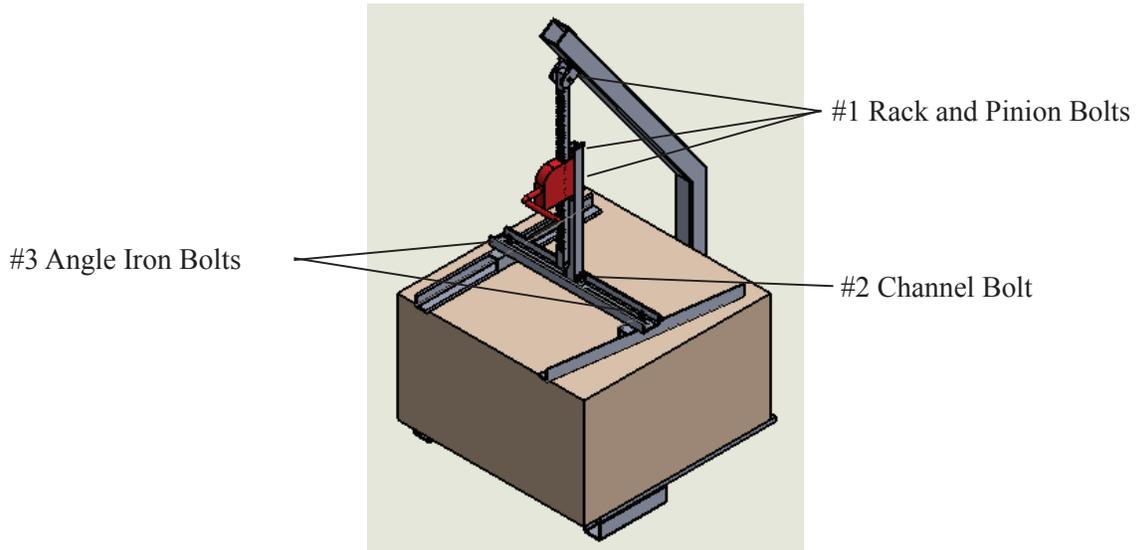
Positions of bolts in the rack and pinion sand mold clamp assembly.
